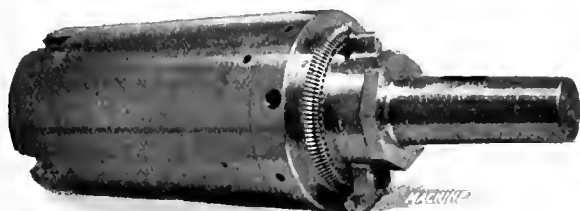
A Large Rifling Head, showing Rotating Adjustment.
